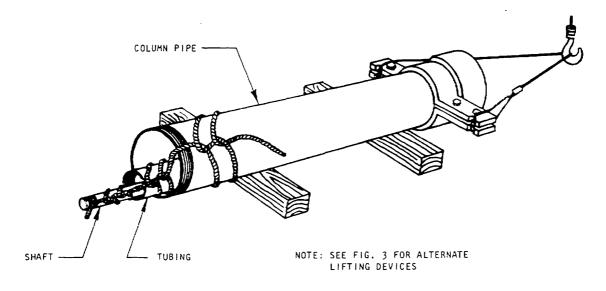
ENCLOSED LINESHAFT COLUMN SECTION RIGGED FOR LIFTING
